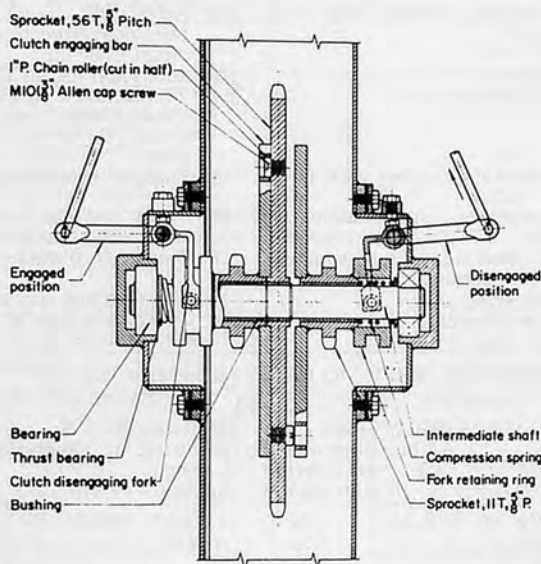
Cross-sectional view of steering clutches for 6-8 hp Power Tiller
